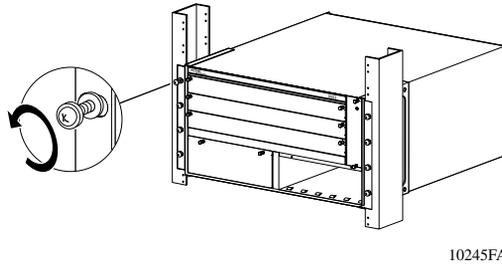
Loosening the rack-mounting screws: 8003 Chassis
